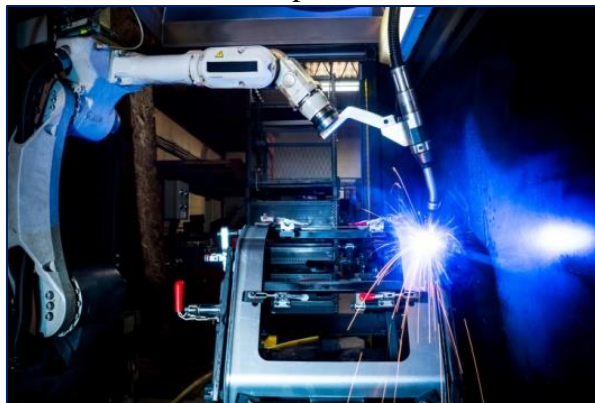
Industrial arm-joint robot used for welding [22]
